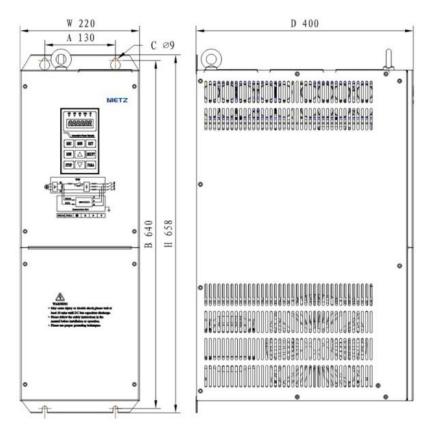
C4 wall-mounted chassis dimensions and installation dimensions
